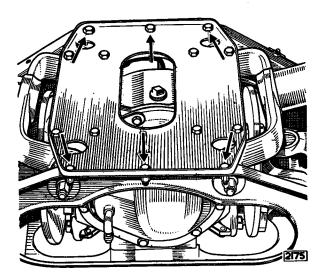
Showing the six bolts which secure the tie plate to the cross beam.
